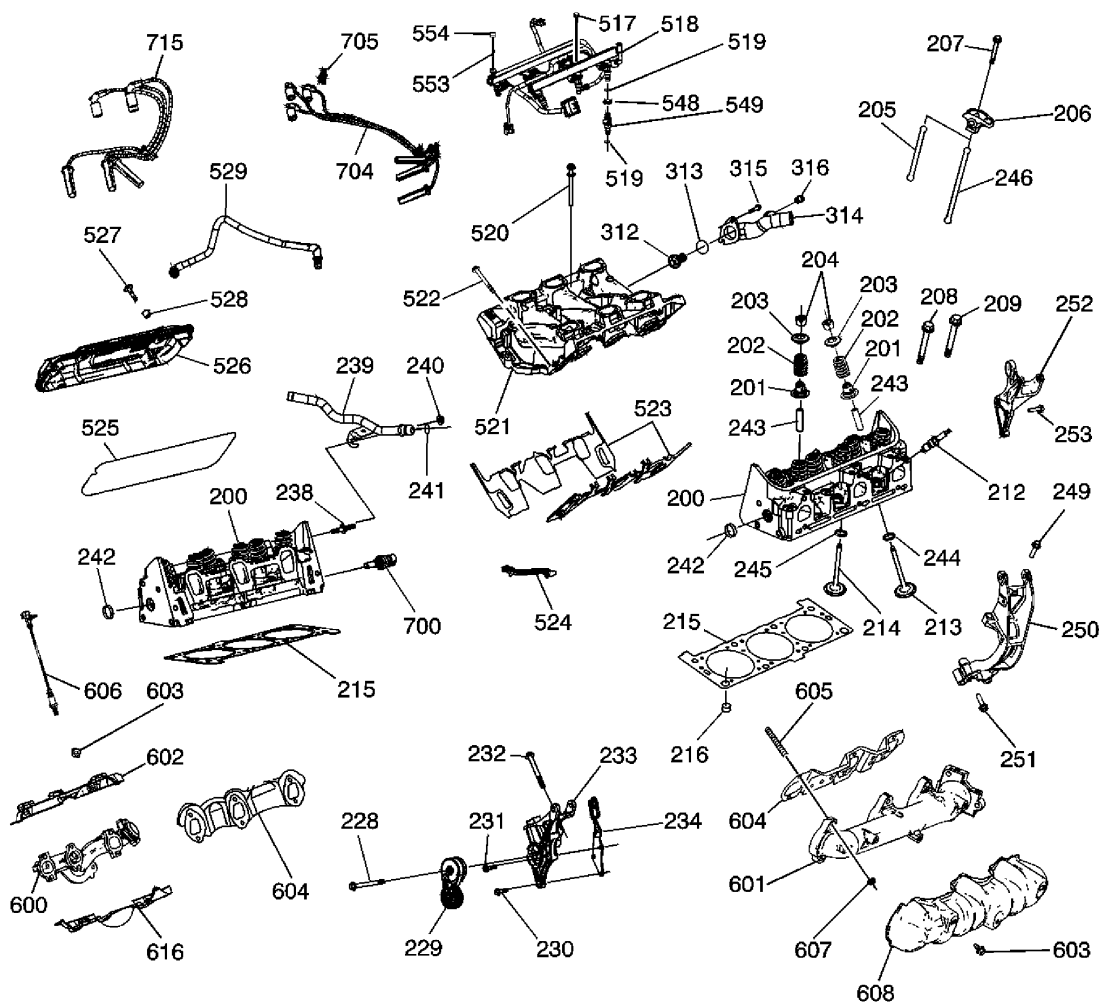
Identifying Lower Intake Manifold, Cylinder Head and Components
